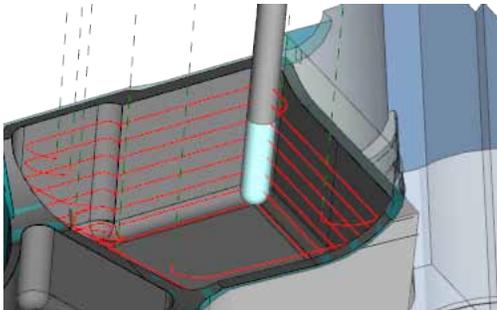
Stop at Floor protects floor surfaces. The tool stops when it reaches the bottom of the wall.
